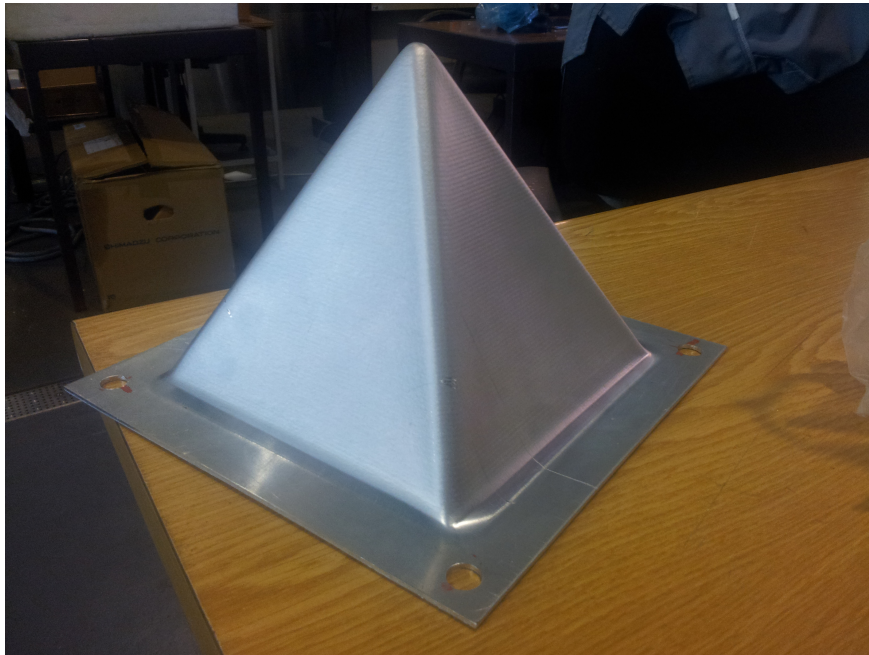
Pyramid in 2 millimeter thick aluminium sheet with 150 millimeter depth.
